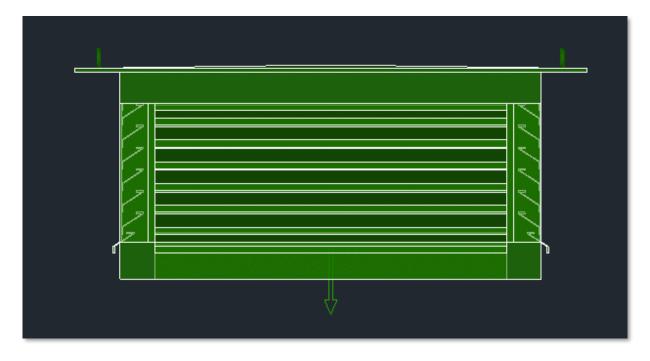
Exhaust roof hood product 3D geometry in AutoCAD drawing
